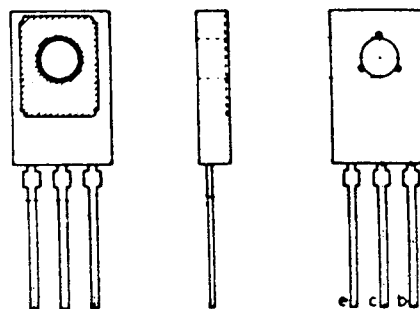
TO220 Metal Tab with M3 cross recess pan head screw with lock washer - 6kg cm (5 in lb).
